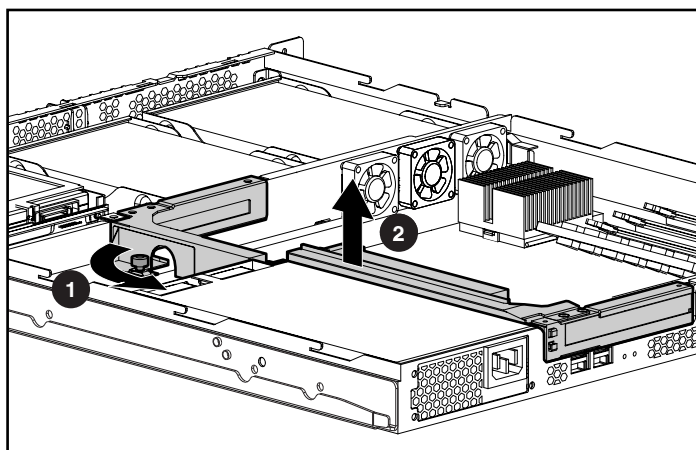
Removing the PCI riser board assembly (module removed for clarity)
